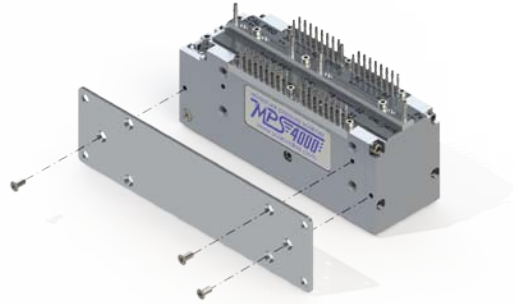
MPS4264 MOUNTING PLATE, SIDE
